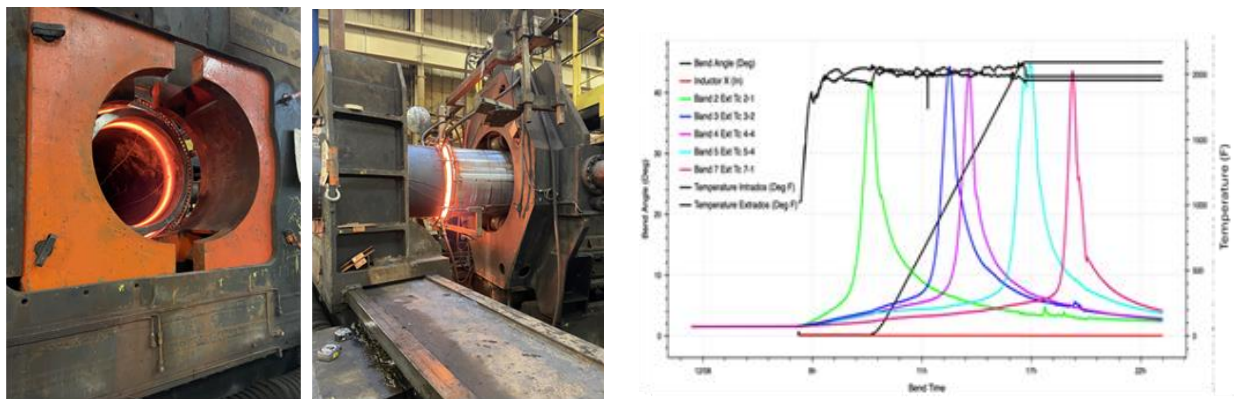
Instrumented bending trial at Tulsa Tube Bending Inc. Left: Set-up during heating prior to clamping, Center: Bending underway, Right: Example of thermocouple traces.
